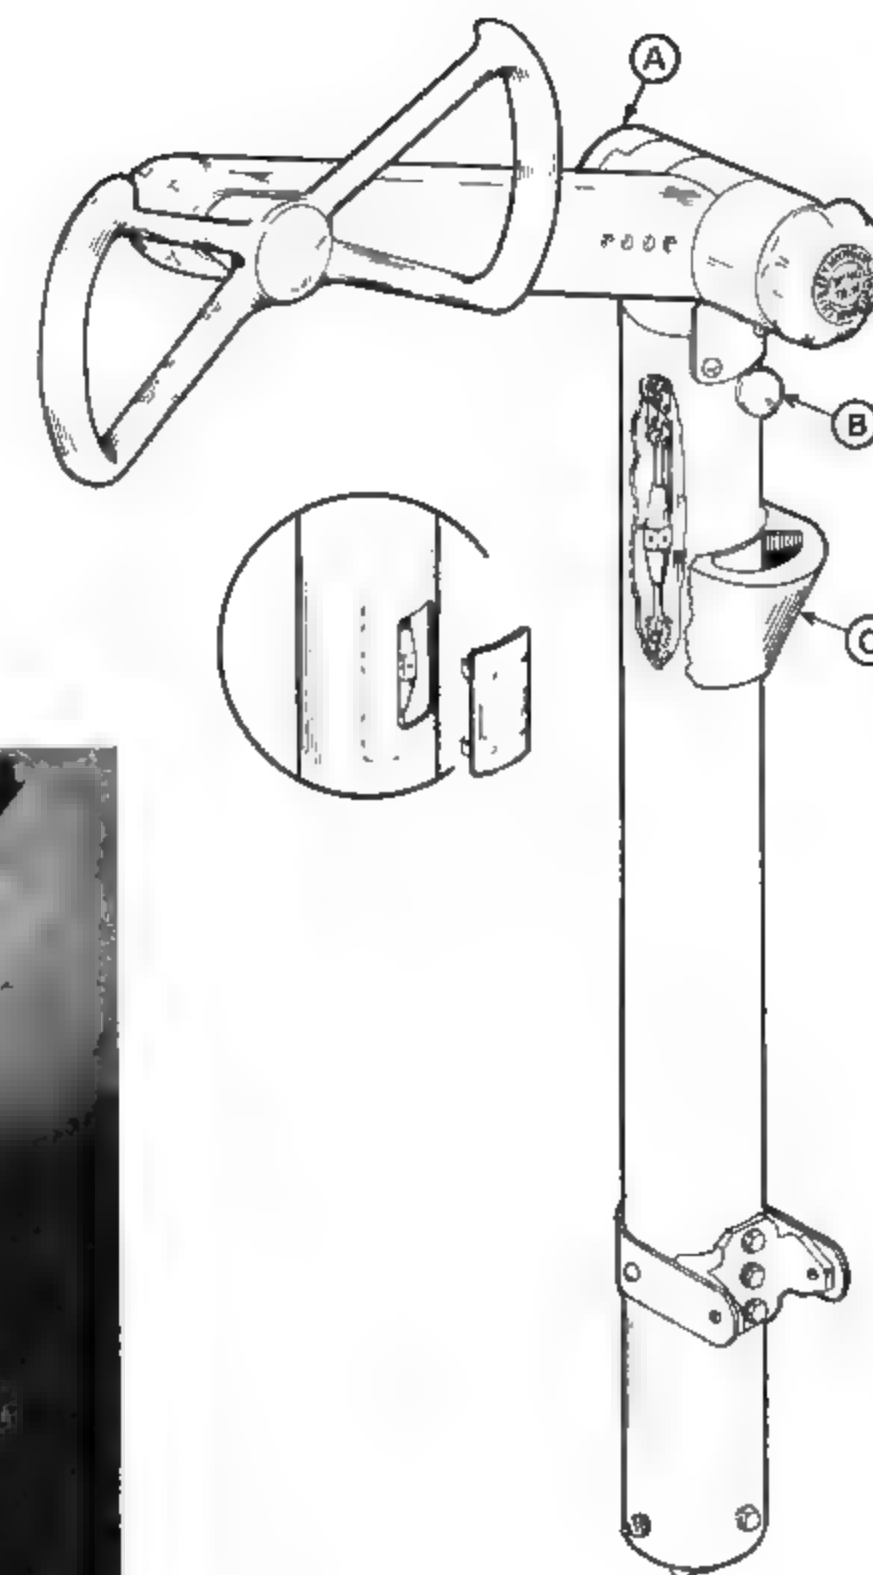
Control column and wheel installation. Auxiliary wheel for co-pilot is quickly attached via snap-on fitting at (A). Pilot's wheel may be thrown over by pressing down on button (B). Ash receiver is seen at (C).
